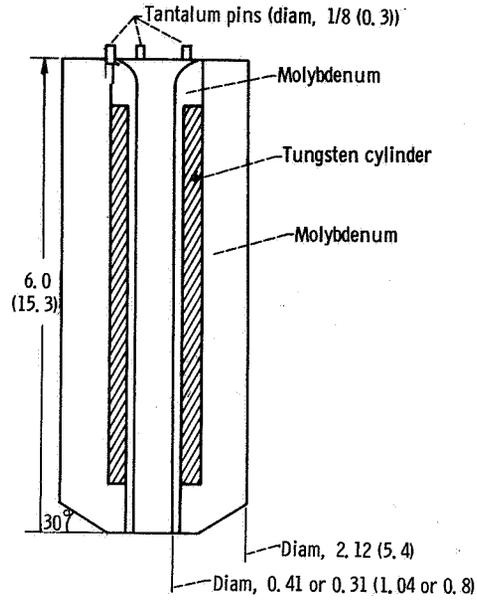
Schematic of billet assembly for extrusion of tungsten tubing. (Dimensions are in inches (cm).)
